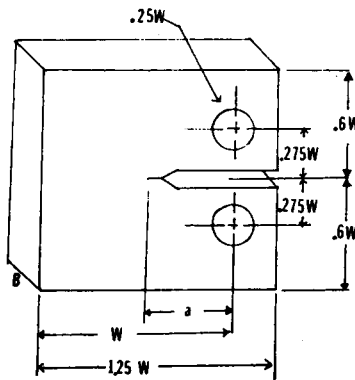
The specimen geometry and dimensions used in the compact tension test.
